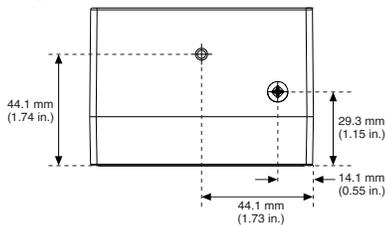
cRIO-9066/9067/9068 Side Dimensions, Typical
